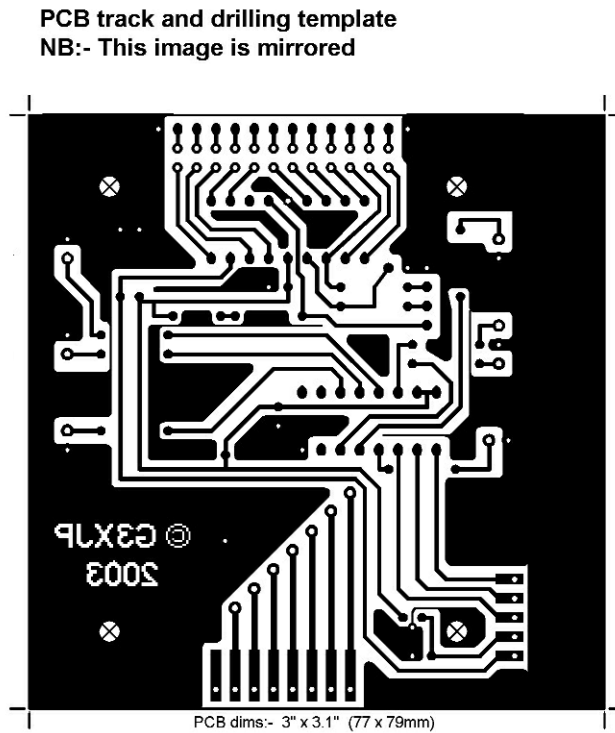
Status Board PCB track and drilling template. NB: This image is reversed
